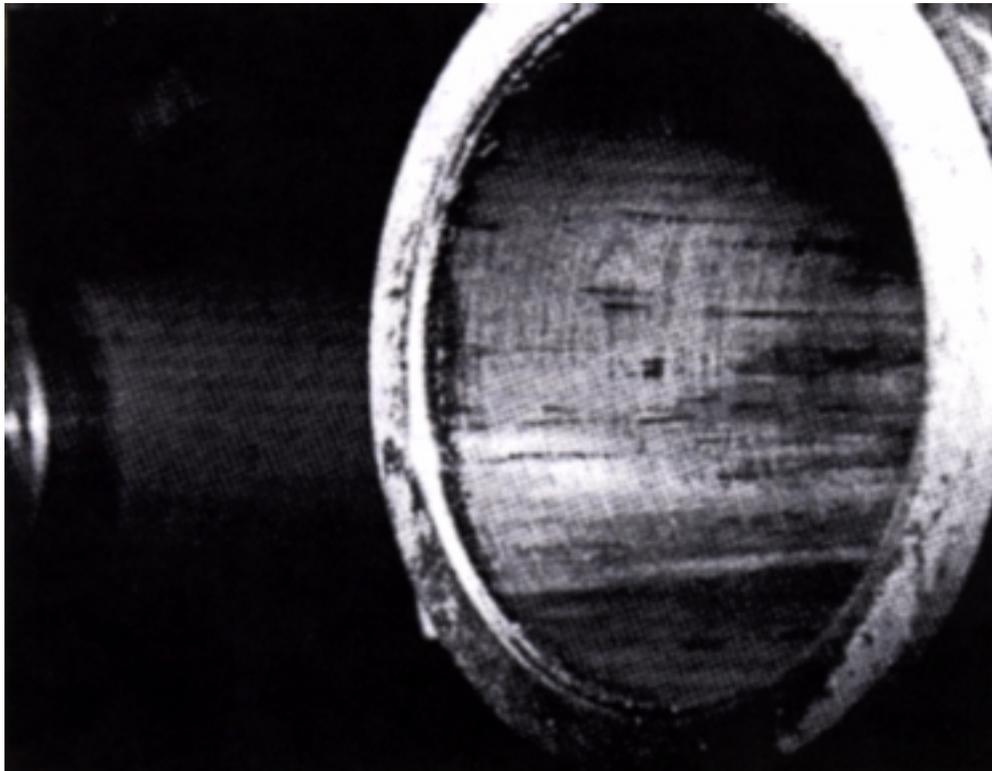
M256 Cannon Tube: typical clean bore appearance.
